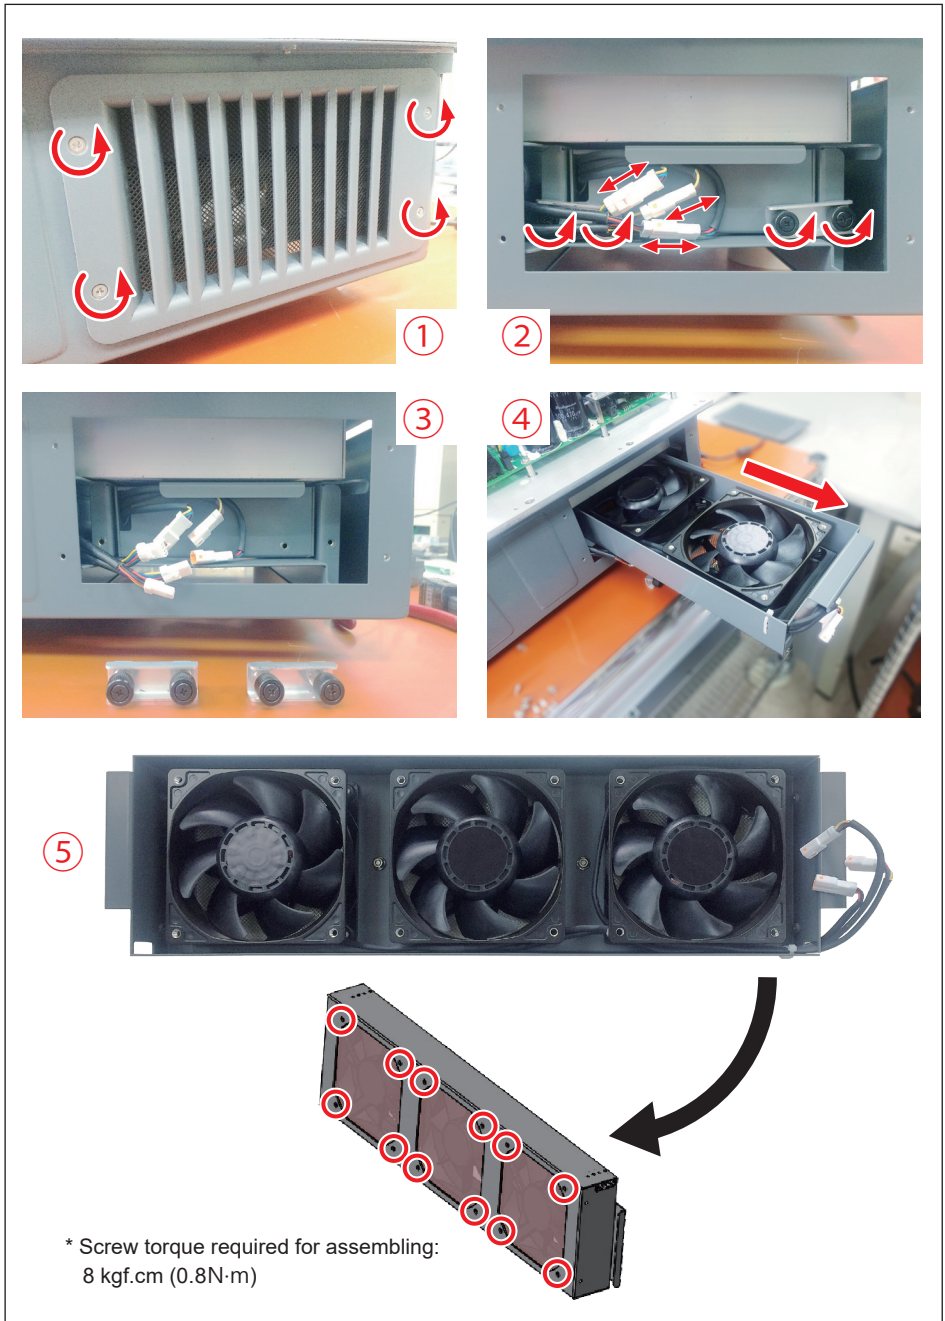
Disassembling fans inside the power module compartment (showing one side only)
